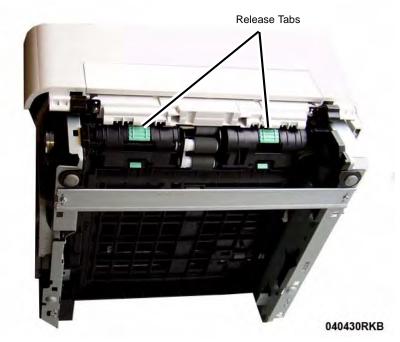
Duplex Assembly Release Tabs (Bottom View)
